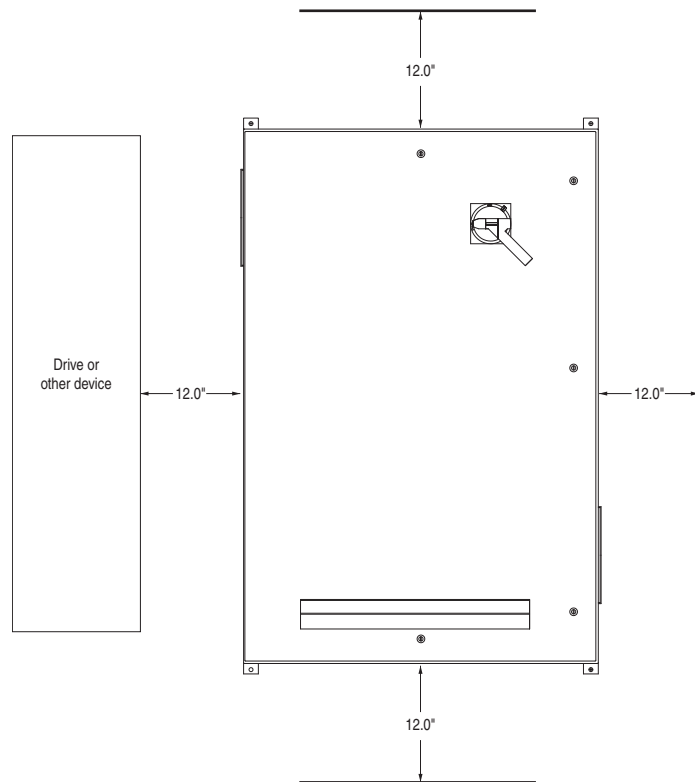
NEMA/UL Type 4 Minimum Mounting Clearances
